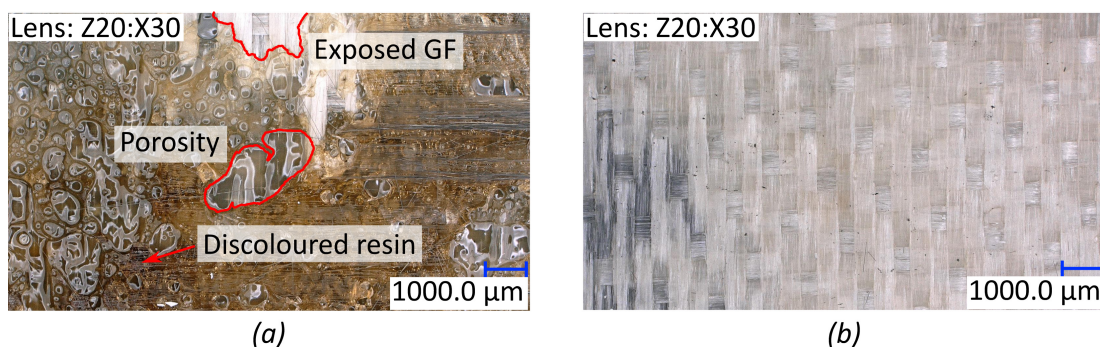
RW DCB fracture surface: (a) overheated specimen, (b) target cycle specimen.
